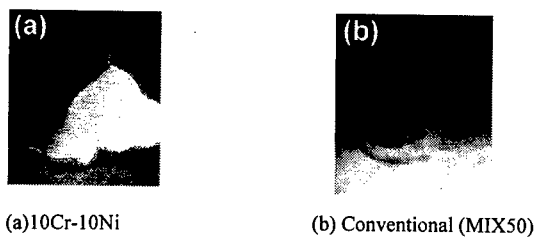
Macroscopic view of welded cross section at the end of attachment.
